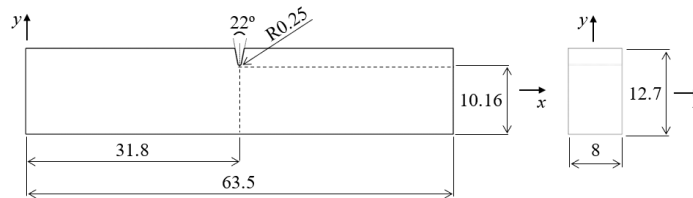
Test specimen for Izod impact tests (dimensions in mm).
